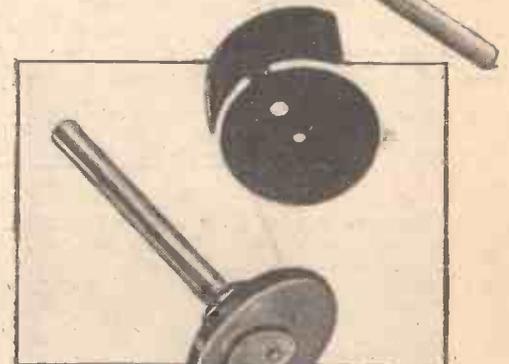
Shutter removed showing 8 mm. cam (.432in.) spigoted to 9.5 mm. cam wheel.
